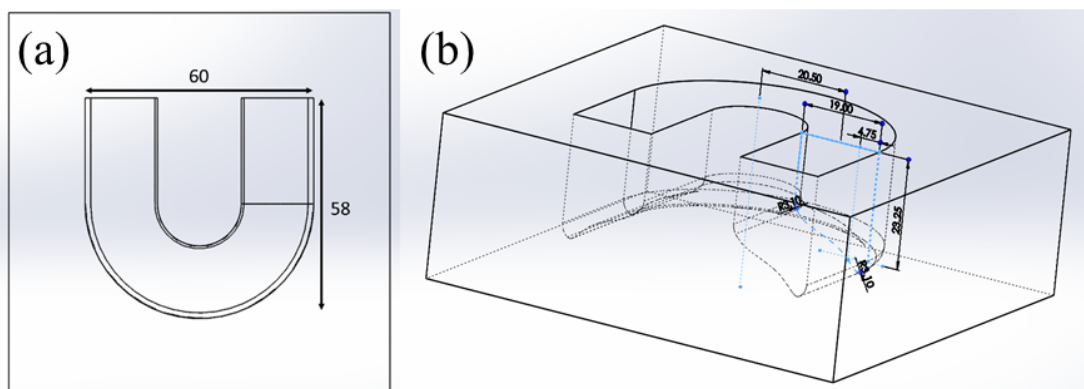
The optimised meniscus mould design (a) top view and (b) side view (units in mm).
